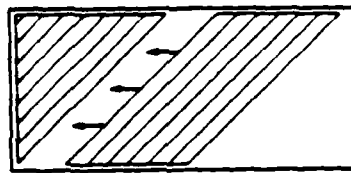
WELDING PIECES OF PREPREG TOGETHER.
